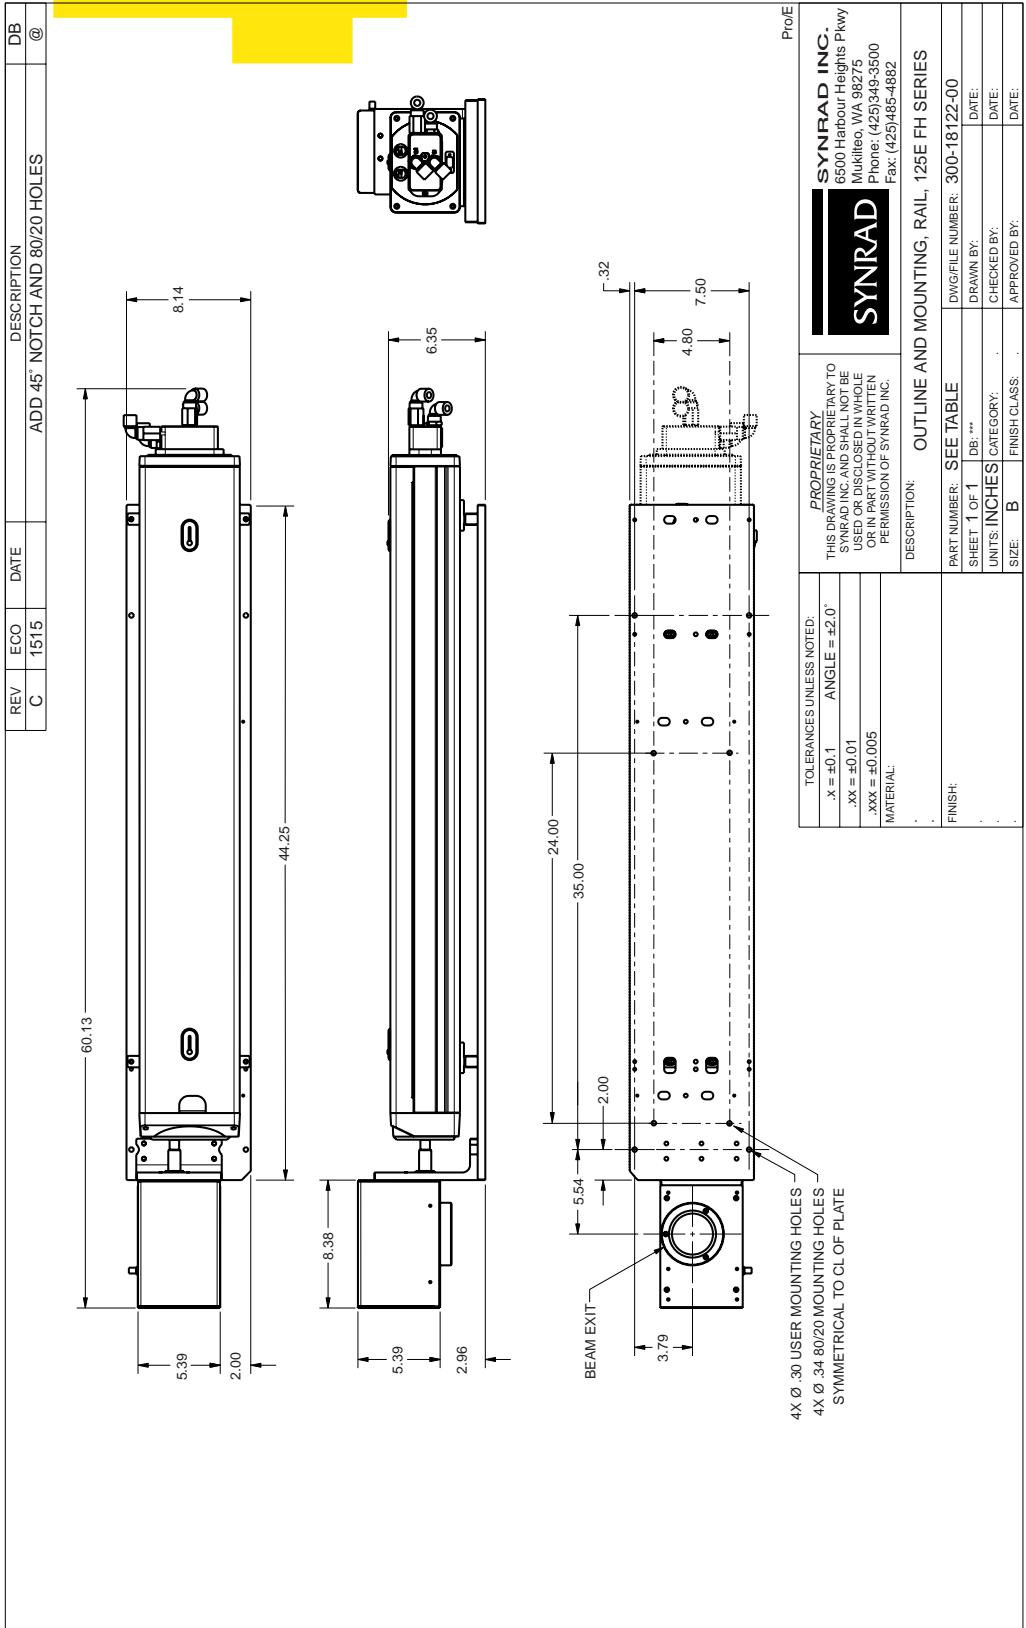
FH Head / Evolution 125 package outline and mounting dimensions
